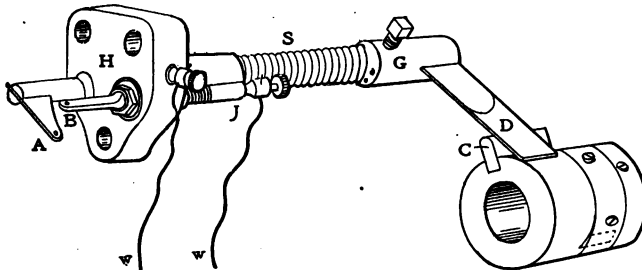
IGNITER OF A MAKE-AND-BREAK SYSTEM.
